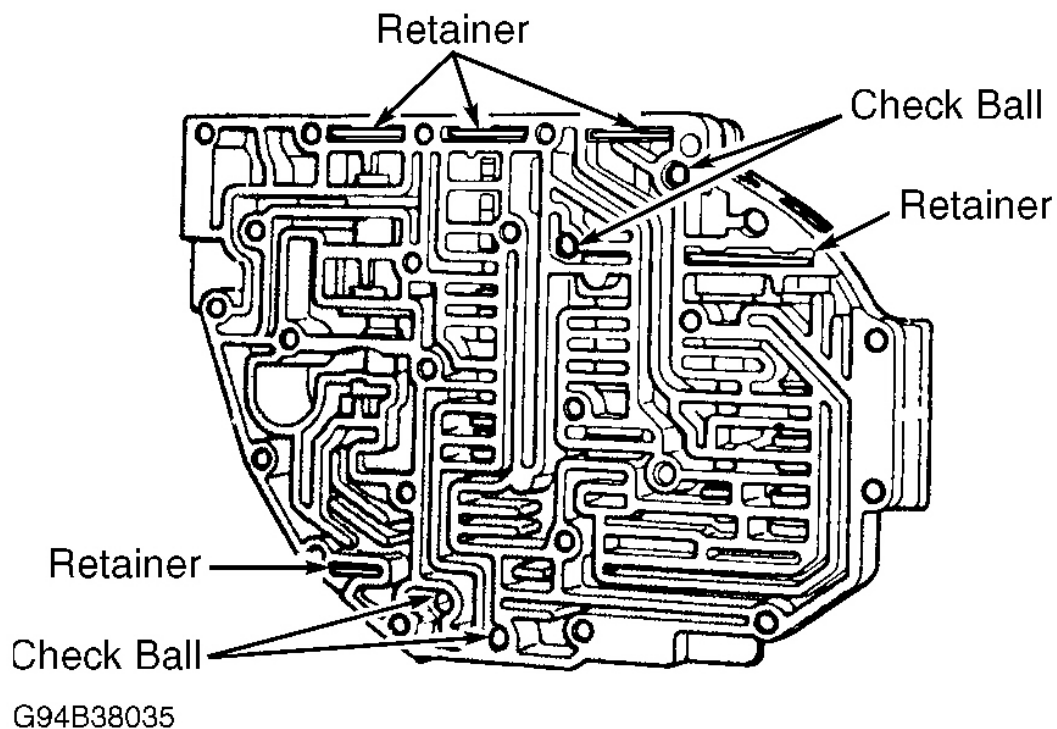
Identifying Valve Body Retainer & Check Ball Locations
